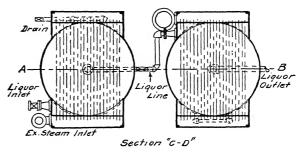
ZAREMBA EVAPORATOR, HORIZONTAL CROSS SECTION.
